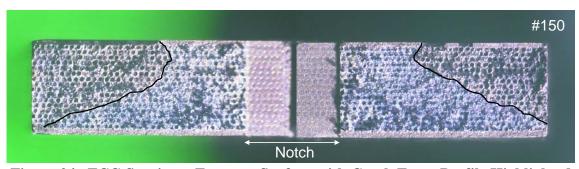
FCG Specimen Fracture Surface with Crack Front Profile Highlighted
